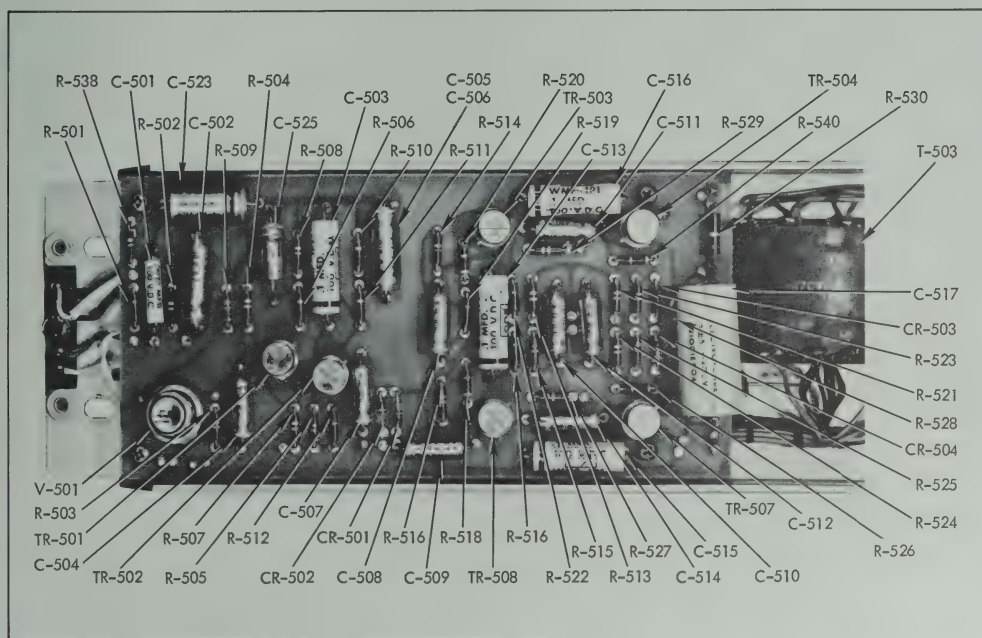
Y₂ PRINTED CIRCUIT BOARD
